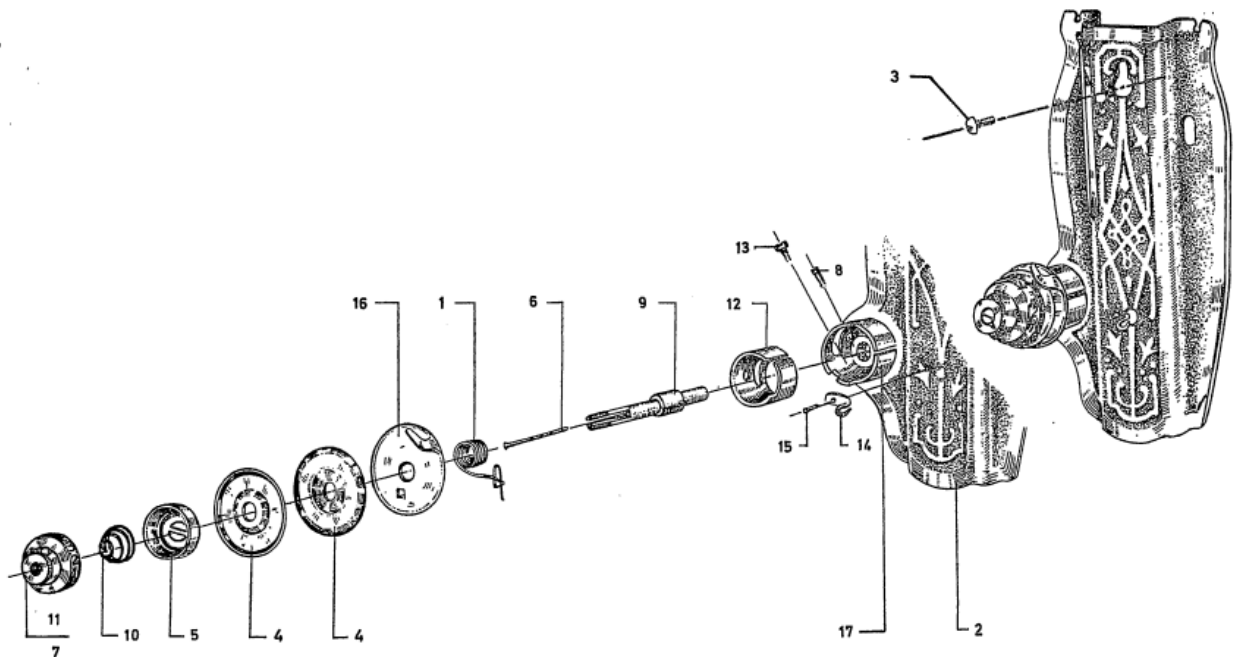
FACE PLATE AND TENSION ASSEMBLY
